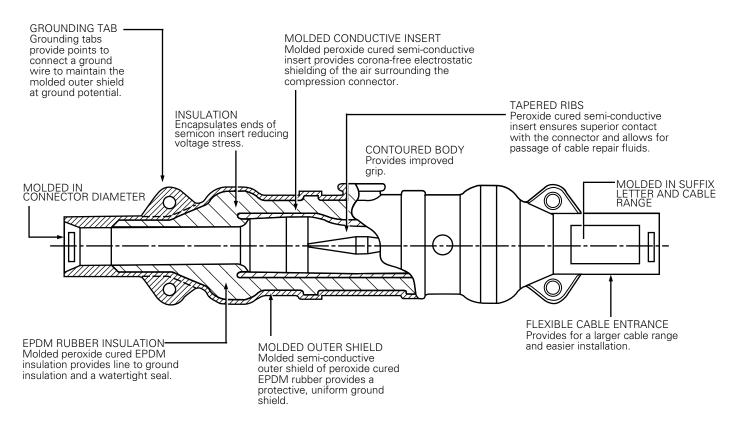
Cutaway illustration shows the molded design integrity of the 15, 25 & 35 kV EZ II splice.
